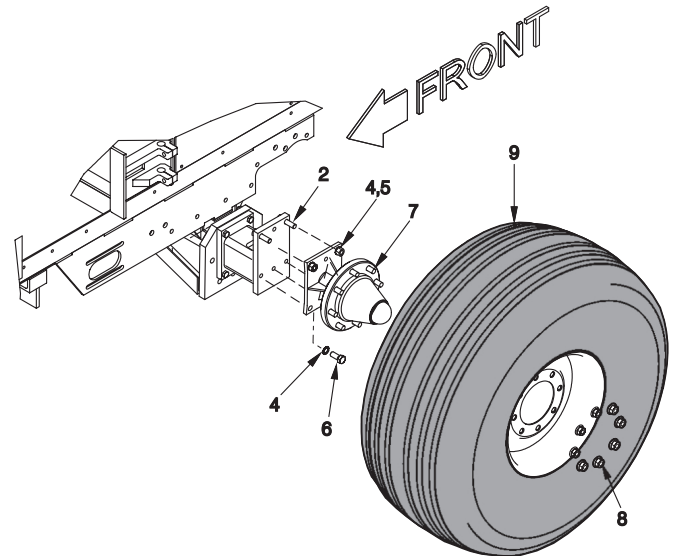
Mounting Hub, Spindle and Tire
